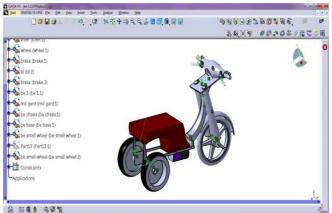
Module Developed in CATIA We tested Power Weeder machine in various types of soil farm.
